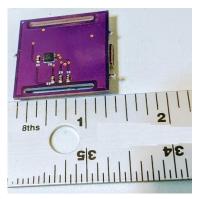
Fabricated Prototype PCBA for low-cost contact thermometer (bottom view).
